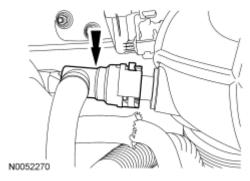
Locating Engine Breather Courtesy of FORD MOTOR CO.
